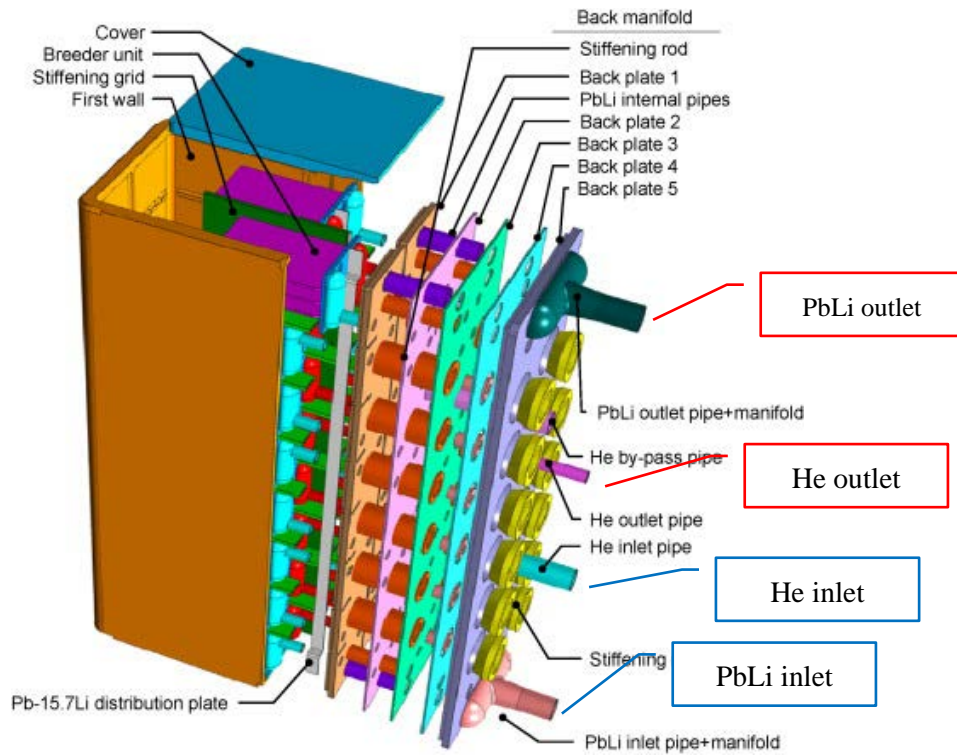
An exploded view of the HCLL-TBM, by F. Gabriel et al. [13]
